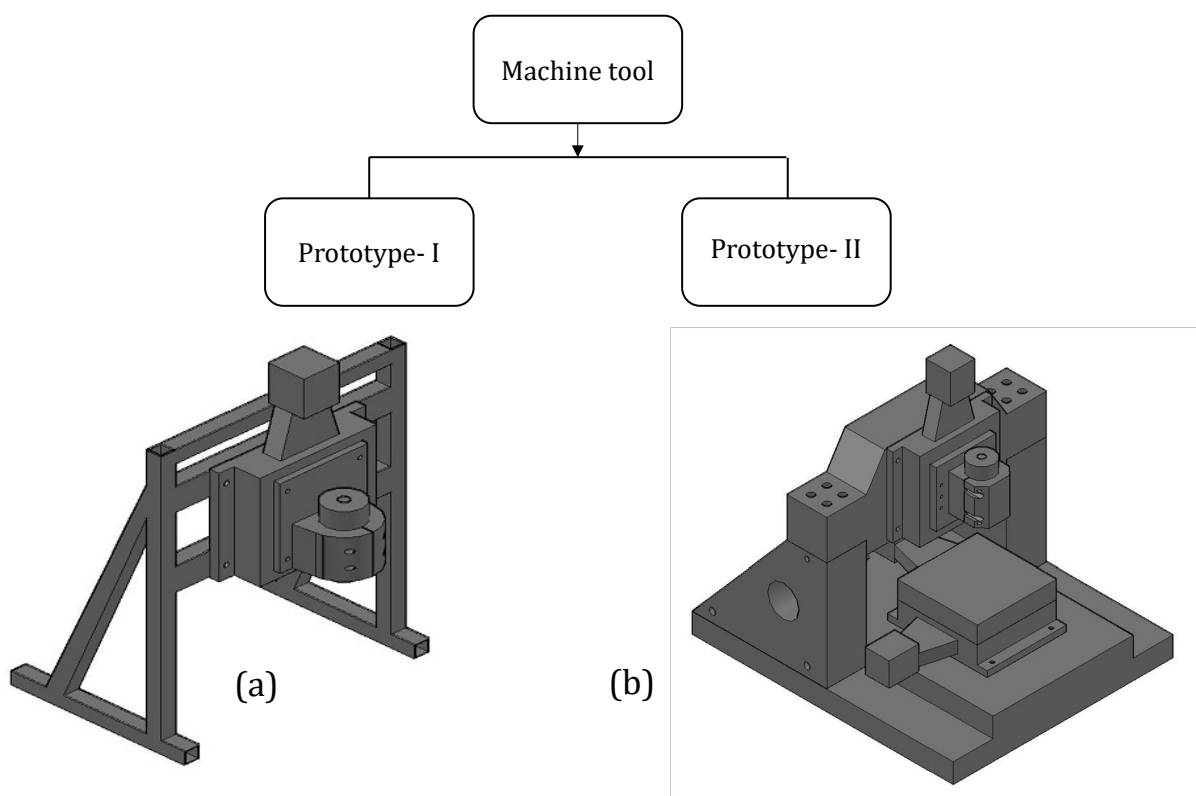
Two different prototypes of the machine tool (a) Prototype-I (b) Prototype-II
